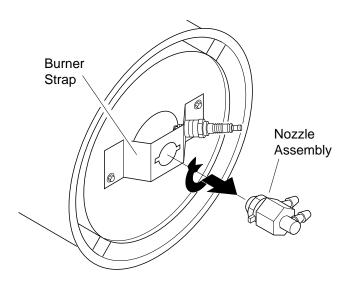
Removing Nozzle Assembly, 8,8 kW (30,000 BTU/Hr) Model
